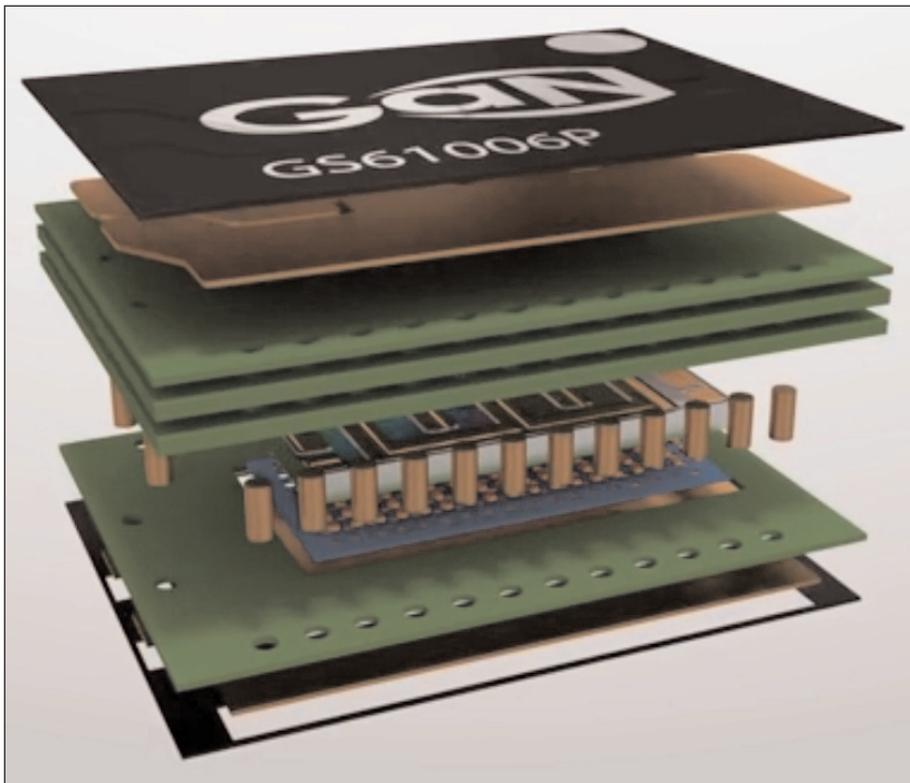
Exploded view of GaN Systems' GaNPX packaging.
